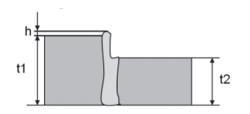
Excessive Height of Weld Seam Affects Die Closure and Formability
